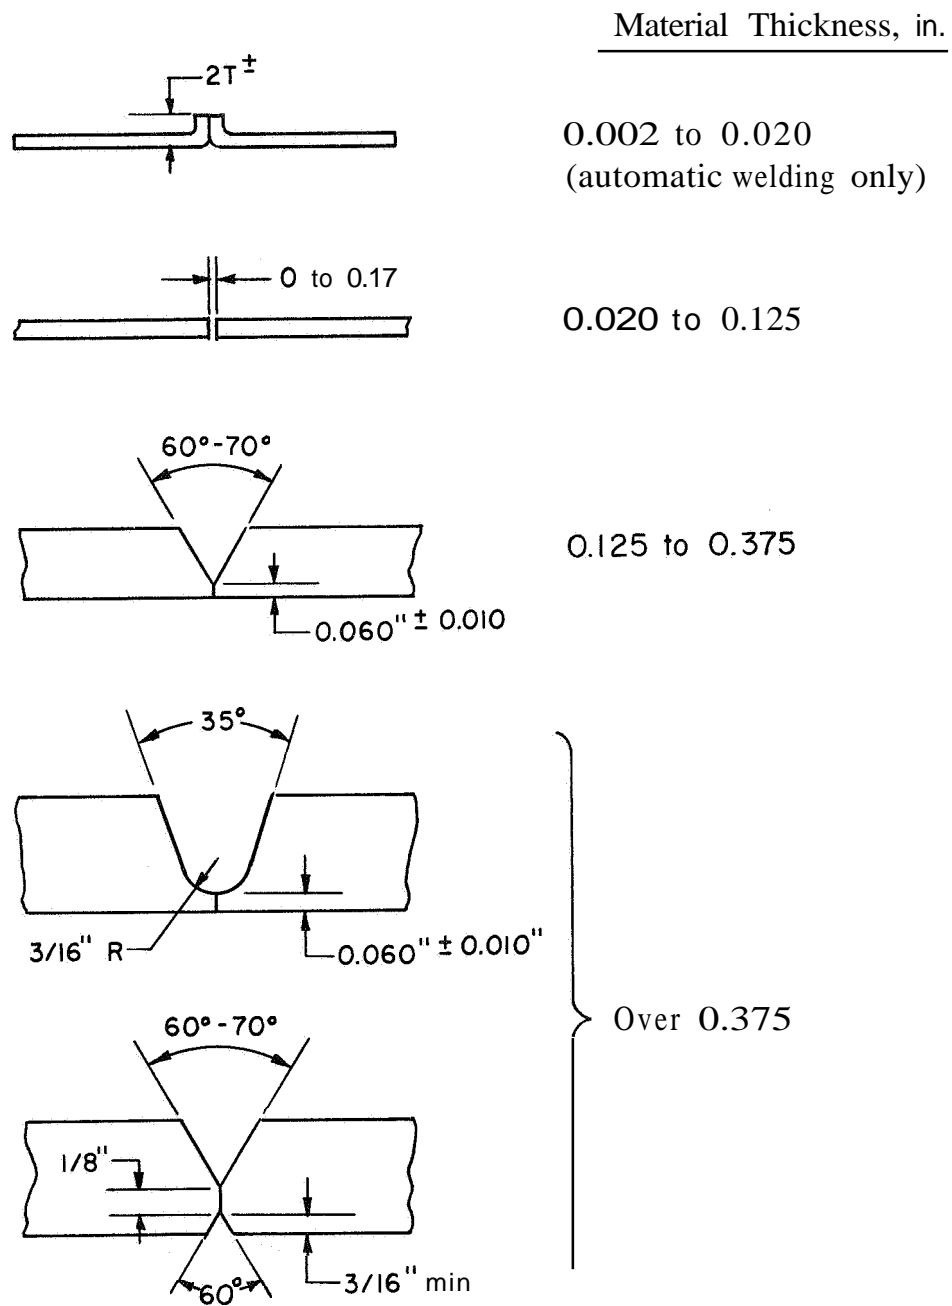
TYPICAL BUTT JOINTS FOR GIA WELDING STAINLESS STEEL (REF.31)
